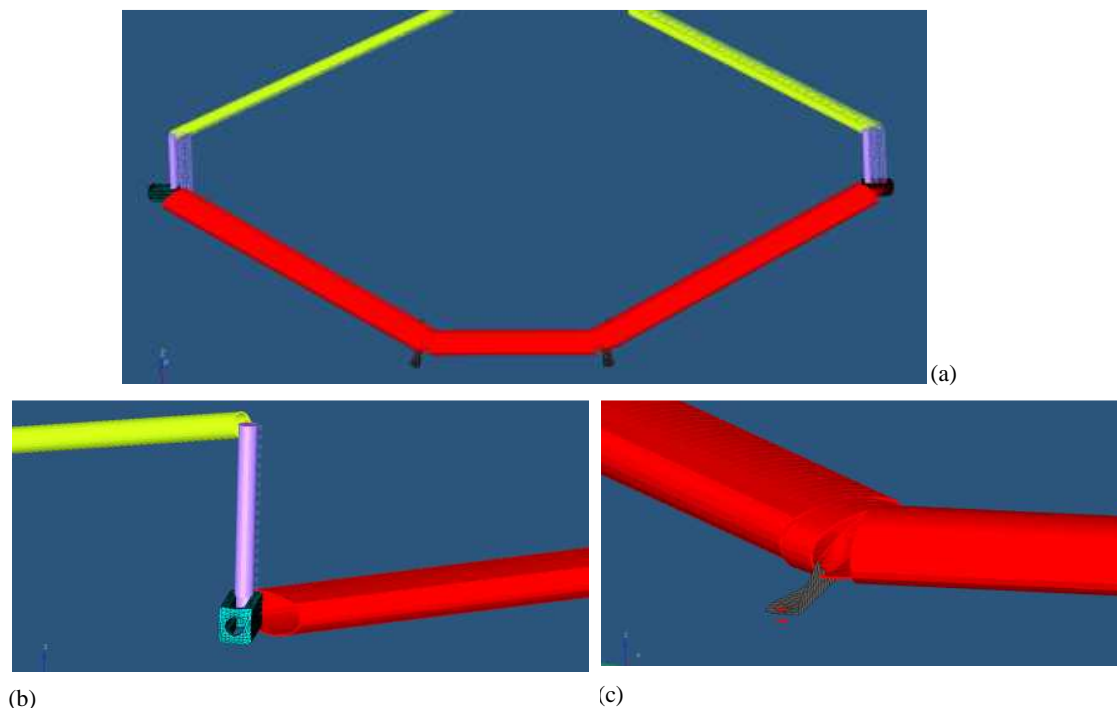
a) the oarlock area, b) the loop, c) the arm welding.
